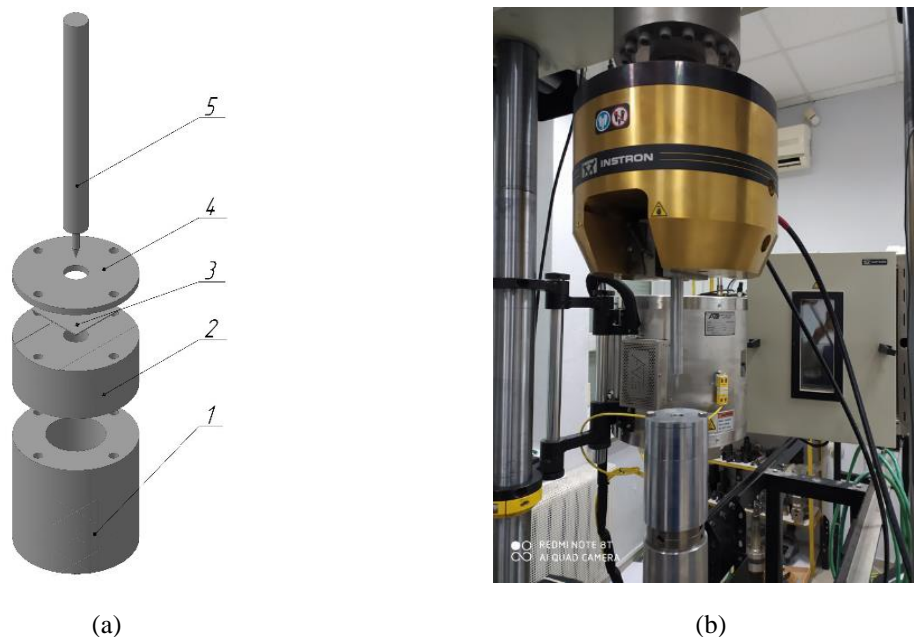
Equipment (a) for punching: 1 – base; 2 – upper die; 3 – specimen; 4 – lower die; 5 – punch; and machine Instron 8802 (b)
